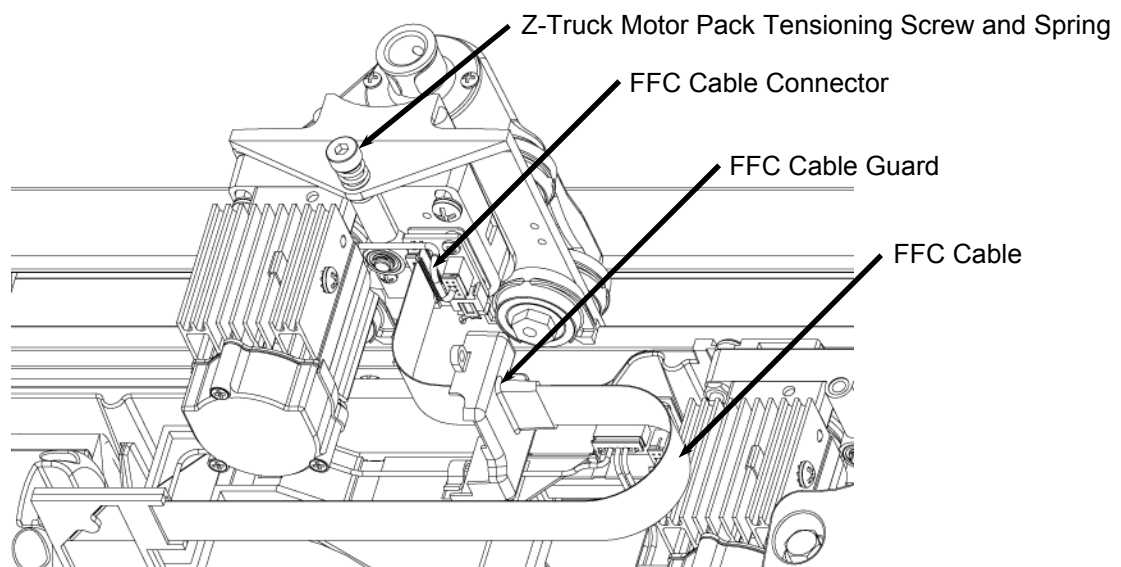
VIEW OF THE BACK OF THE Z-MOTOR PACK
